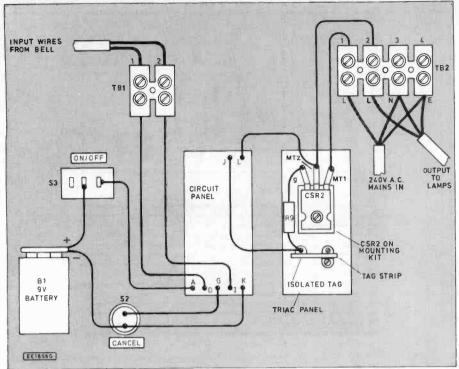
Interwiring from the board and power triac to the switches, battery and terminal blocks.
